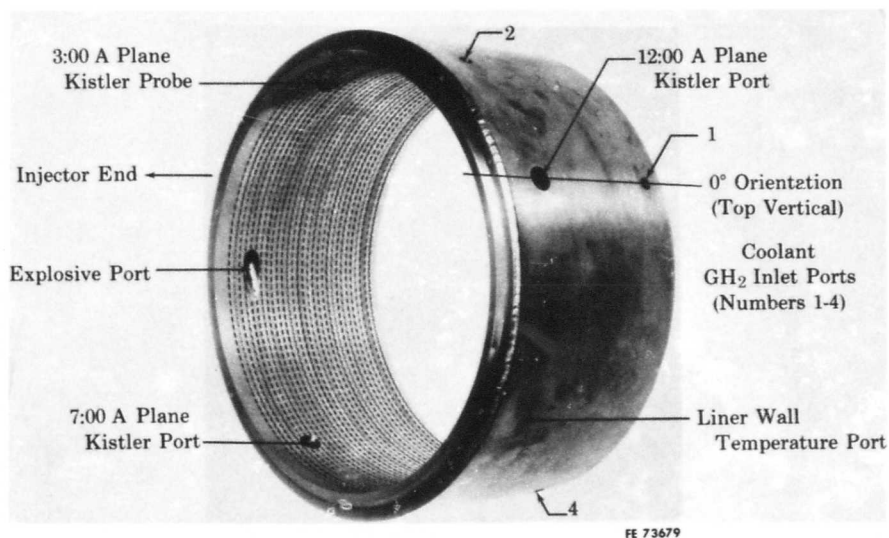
Half-Chamber Length Wafer Liner - Pretest
